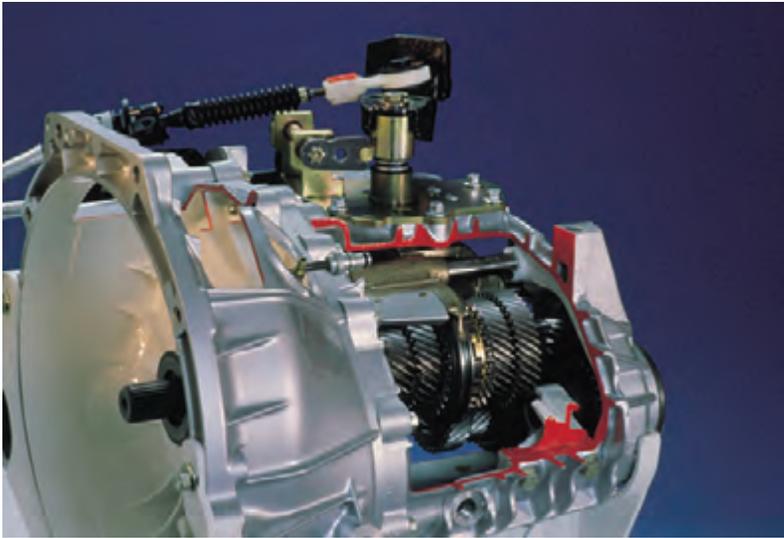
Manual gearbox with a cable change mechanism (Source: Ford Media)
